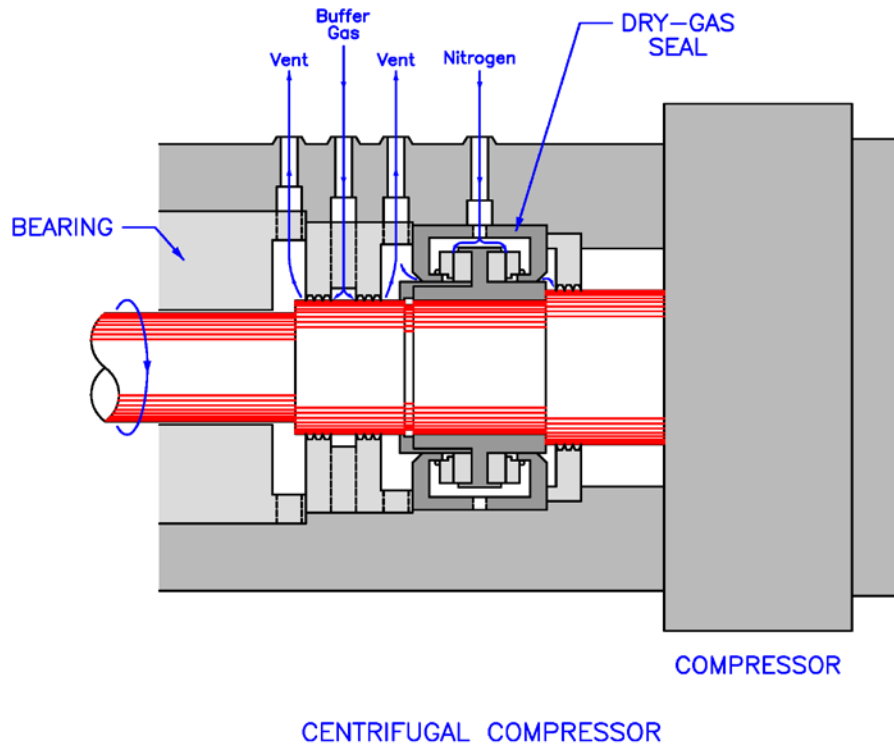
Typical centrifugal compressor dry-gas seal and vent system.
